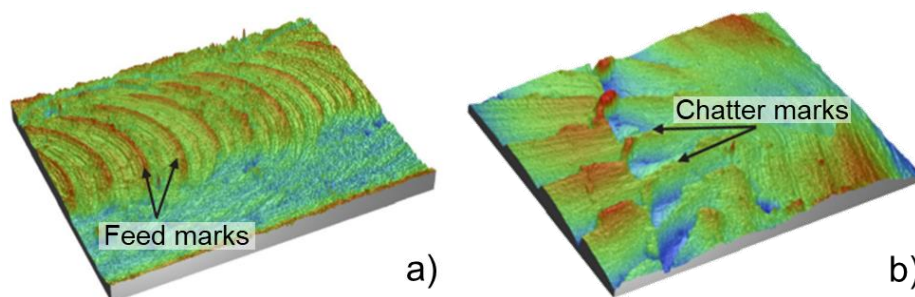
Surface topography after ball-end milling: a) feed marks; b) chatter marks. Adapted from Wojciechowski et al. (2018).
